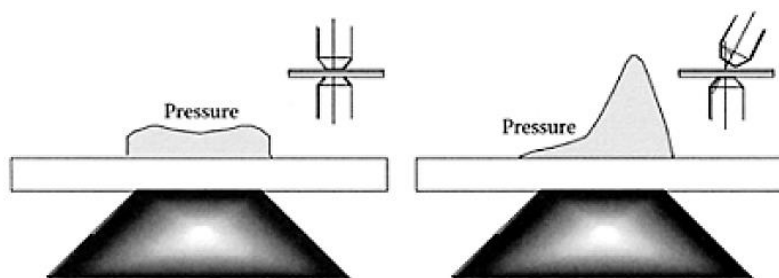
Deflection of welder's arm under electrode force [33]
